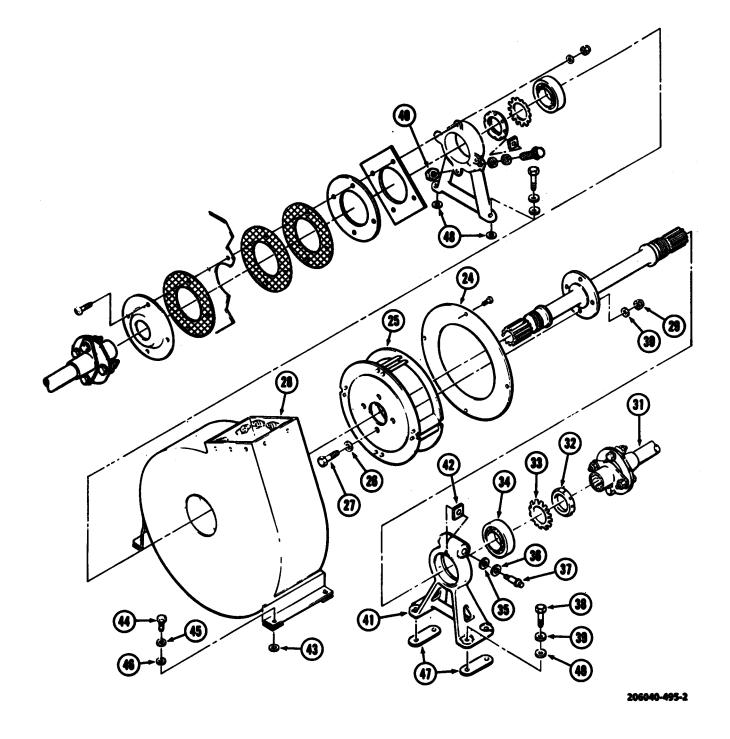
oil Cooling Blower and Shaft Assembly (Sheet 2)
